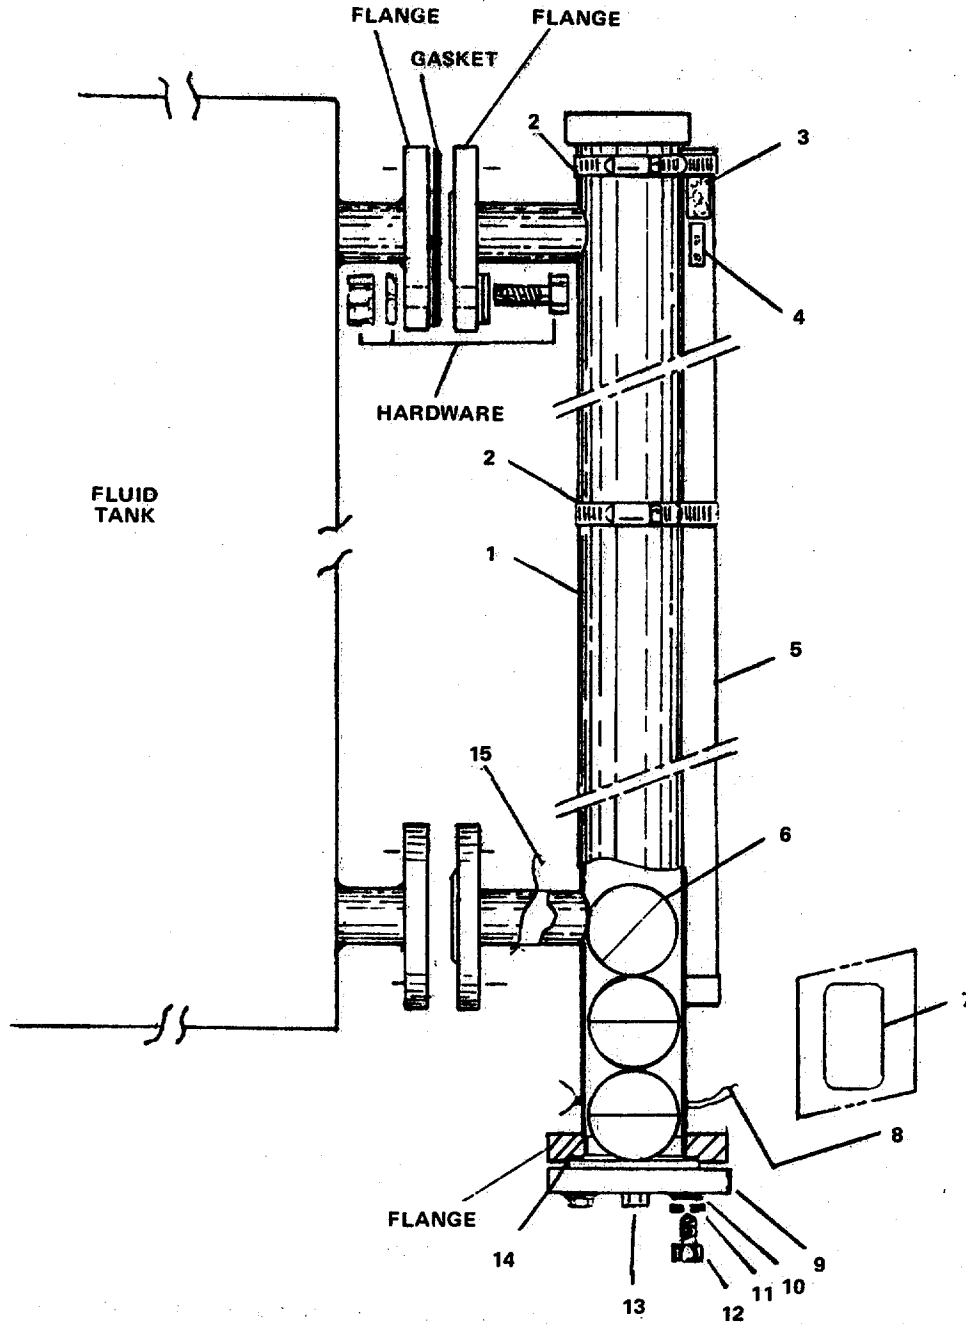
Level Sight Indicator. VLI-86501-7. -20. -44.
